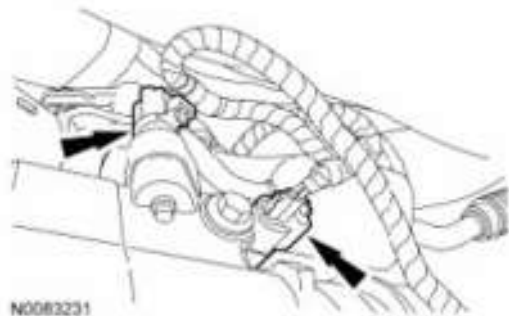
Locating A/C Compressor Electrical Connector And Wiring Harness Retainer
